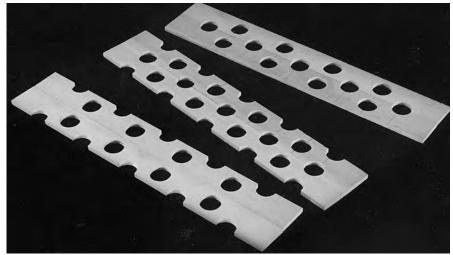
The pieces can be used separately or they can be joined to form panel designs.
